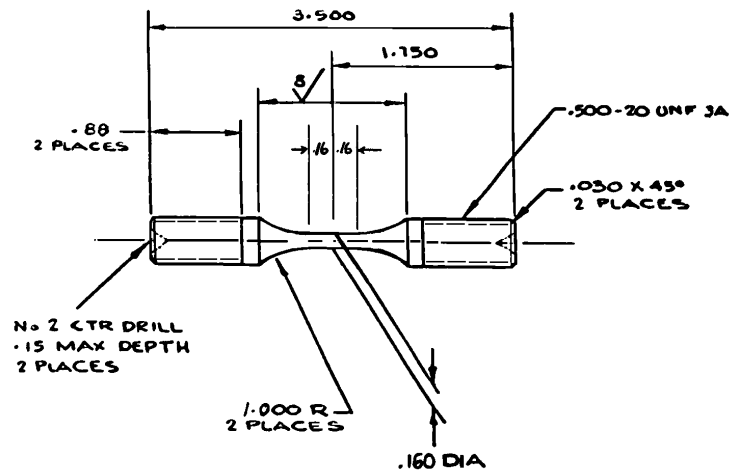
0.16-inch diameter cylindrical GEAE HCF specimen with threaded ends.
